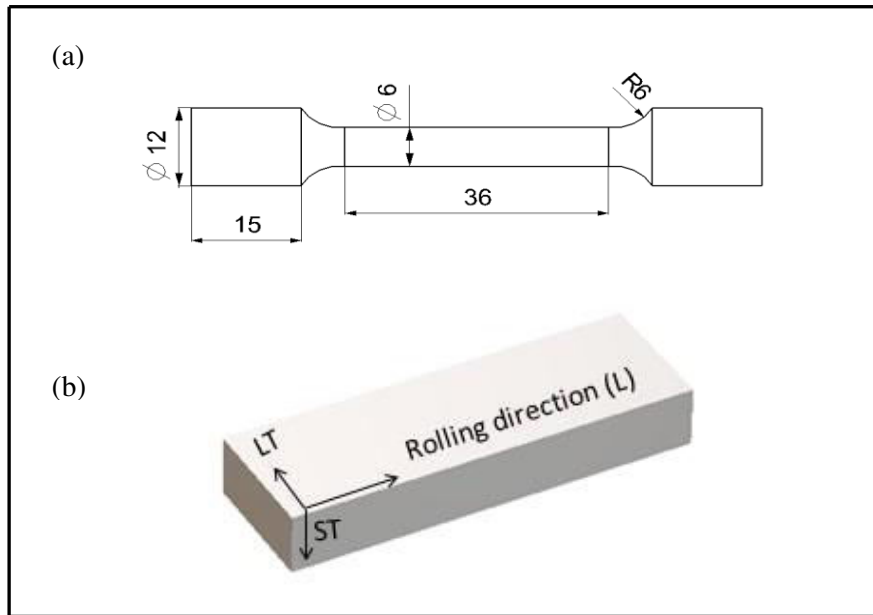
a) Tensile test specimen (all dimensions in mm) b) Schematic representation of the rolled aluminum block
